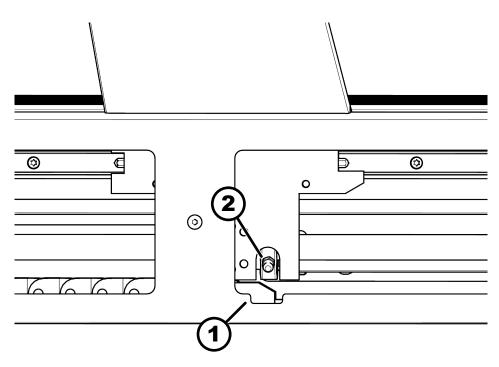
Lubricating nipple X-axis ball screw drive left side
